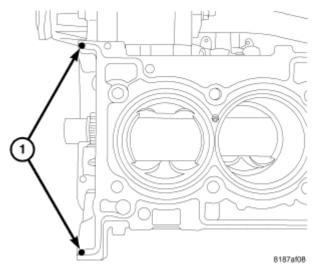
CYLINDER HEAD GASKET RTV Courtesy of CHRYSLER LLC
